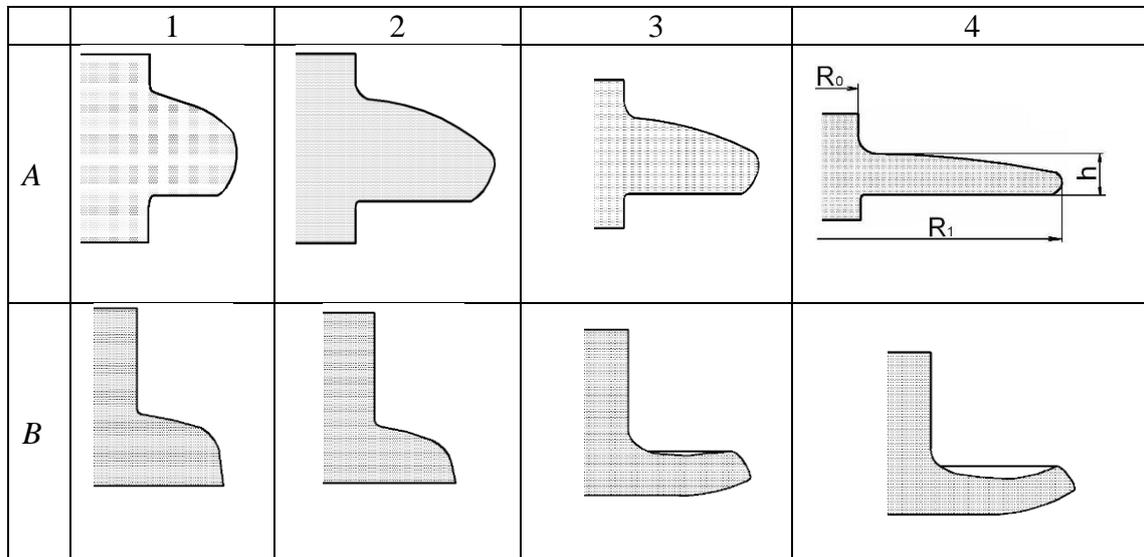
Deviation of the shape of thickenings and flanges in radial extrusion
